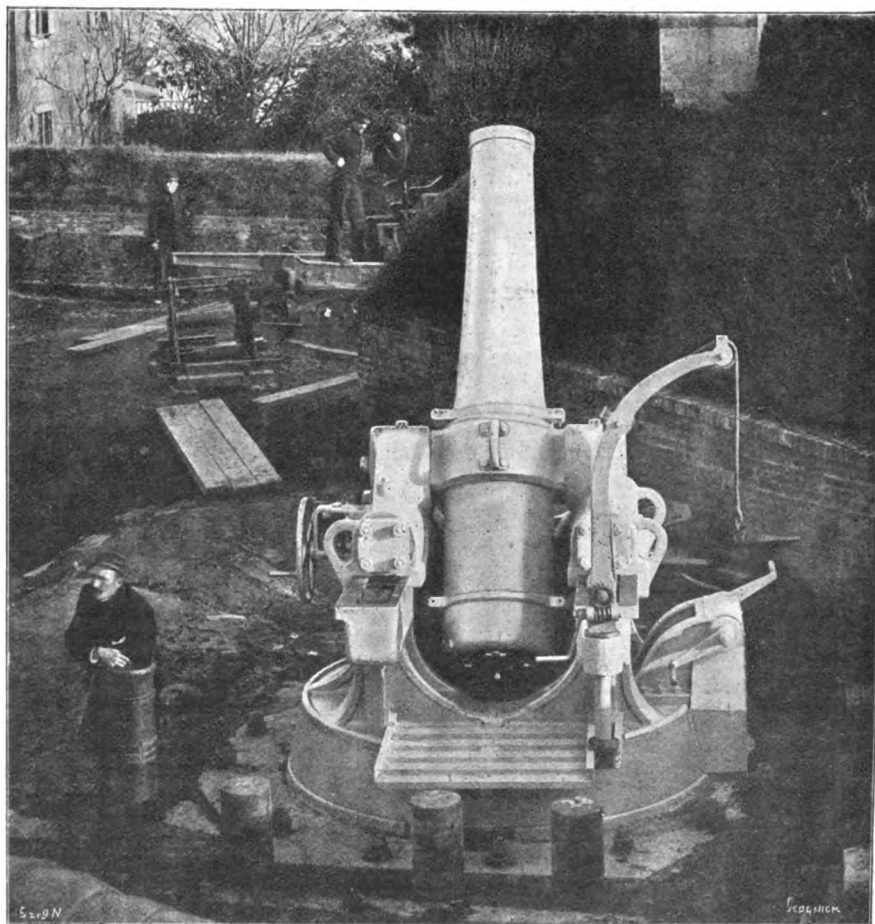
27-CENTIMETRE MORTAR AND COAST-DEFENCE CARRIAGE.
